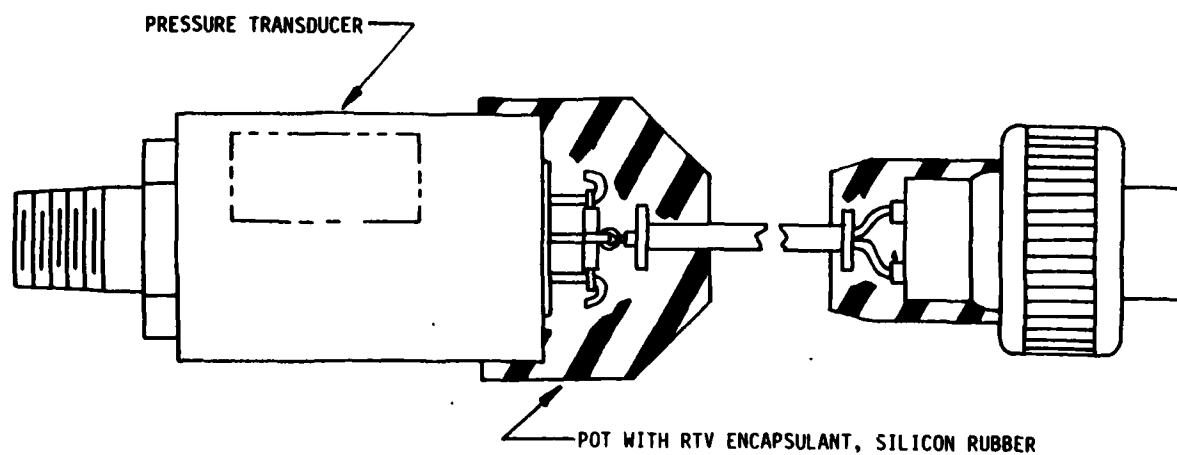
INTERNAL VIEW OF GOODYEAR PRESSURE TRANSDUCER ASSEMBLY
